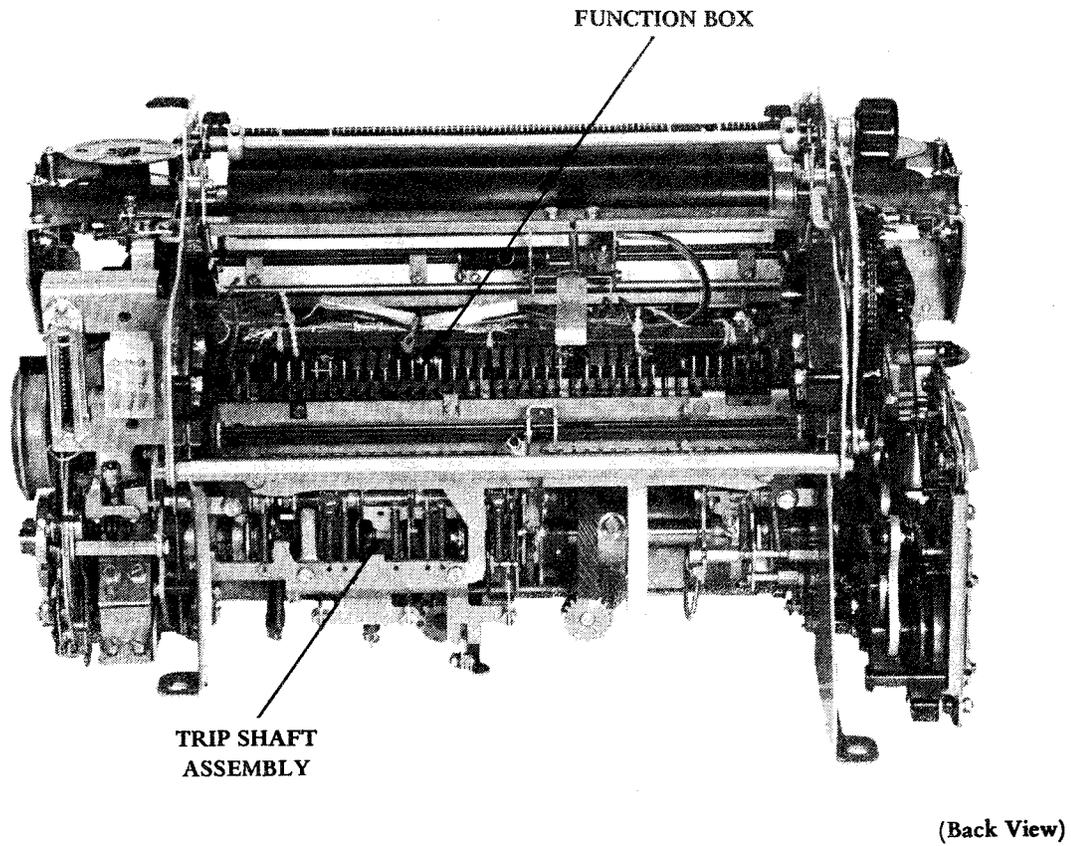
Function Box and Trip Shaft Assembly Mounted in Typing Unit
